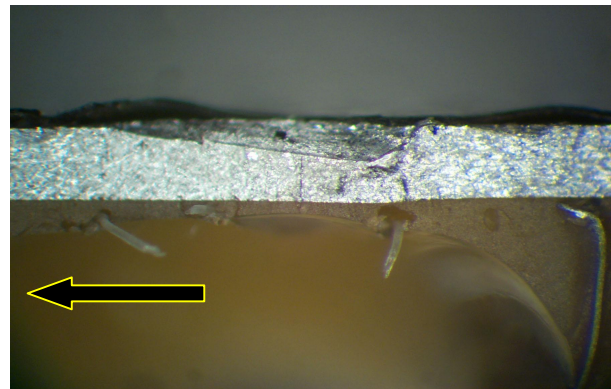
High magnification view of the fracture surface in the skin showing the initiating defect. The arrow points in the direction of the leading edge.
